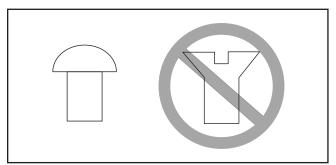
Correct and incorrect screw types for mounting faceplate to workpiece.
